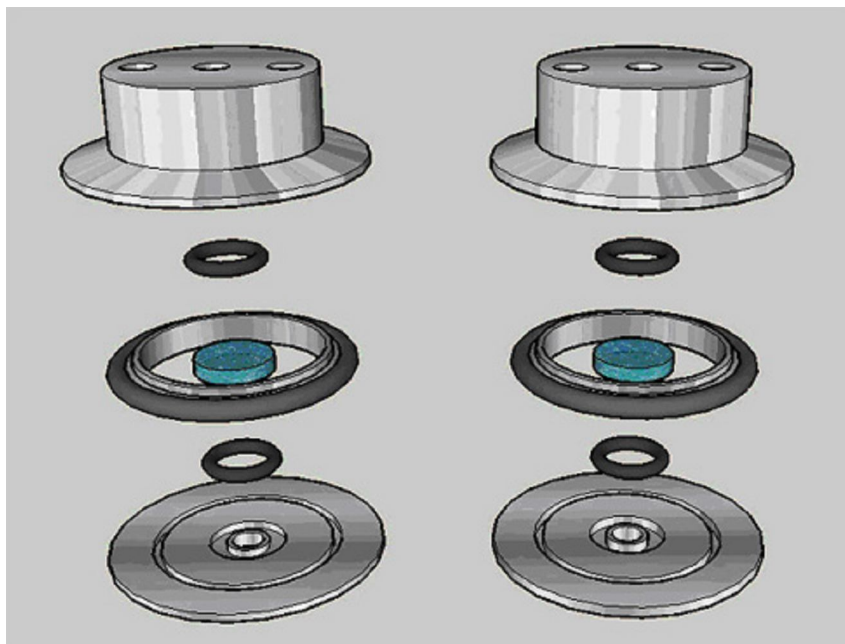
3-D breakaway rendering of the WCH and WC (blue disks) separated into components. The black size 207 O-rings fit in the grooves and seal against the windows of the water cell (blue) while a KF centering assembly (large black ring) uses a large O-ring to seal the water cell chamber. The 1.8 mm WC is on the left, 3.2 mm on the right.
